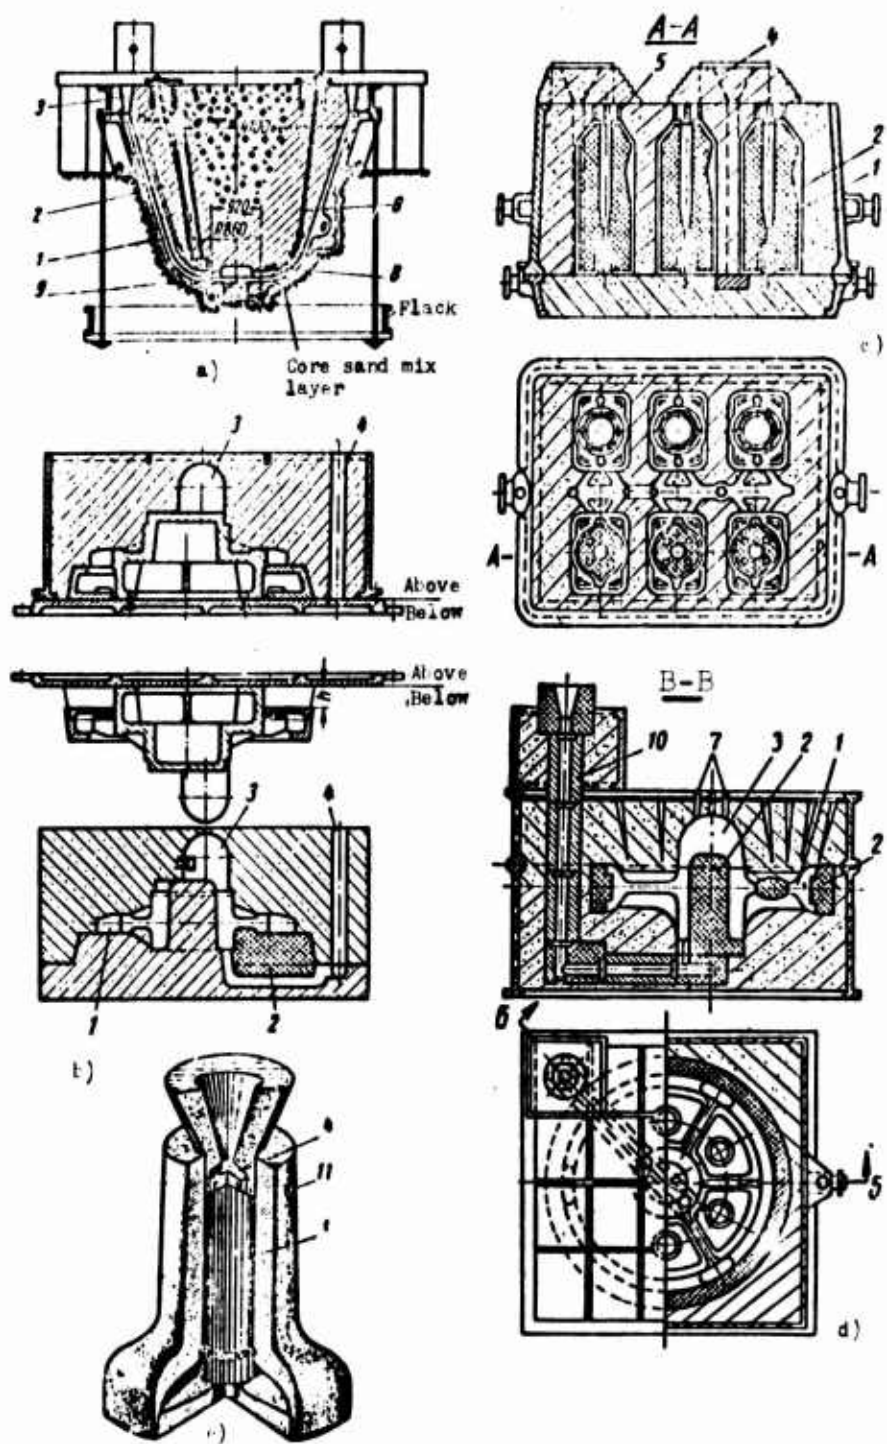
Methods of manufacture of molds: 1 - casting; 2 - core; 3 - riser; 4 - flow gate; 5 - air hole; 6 - frame; 7 - flues; 8 - refrigerators; 9 - chaplets; 10 - ceramic tubes; 11 - chill mold.
